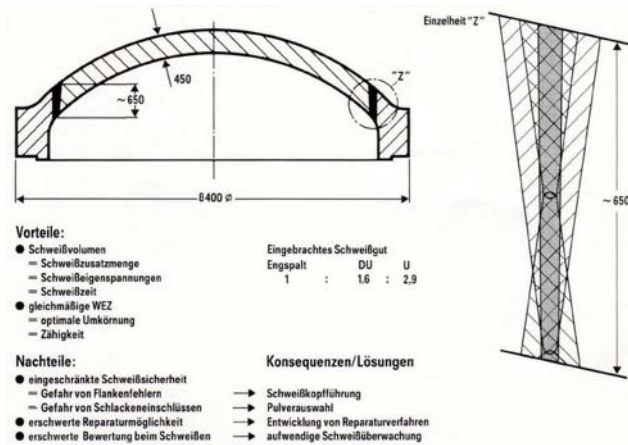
CNA II RPV closure head weld design [34].
